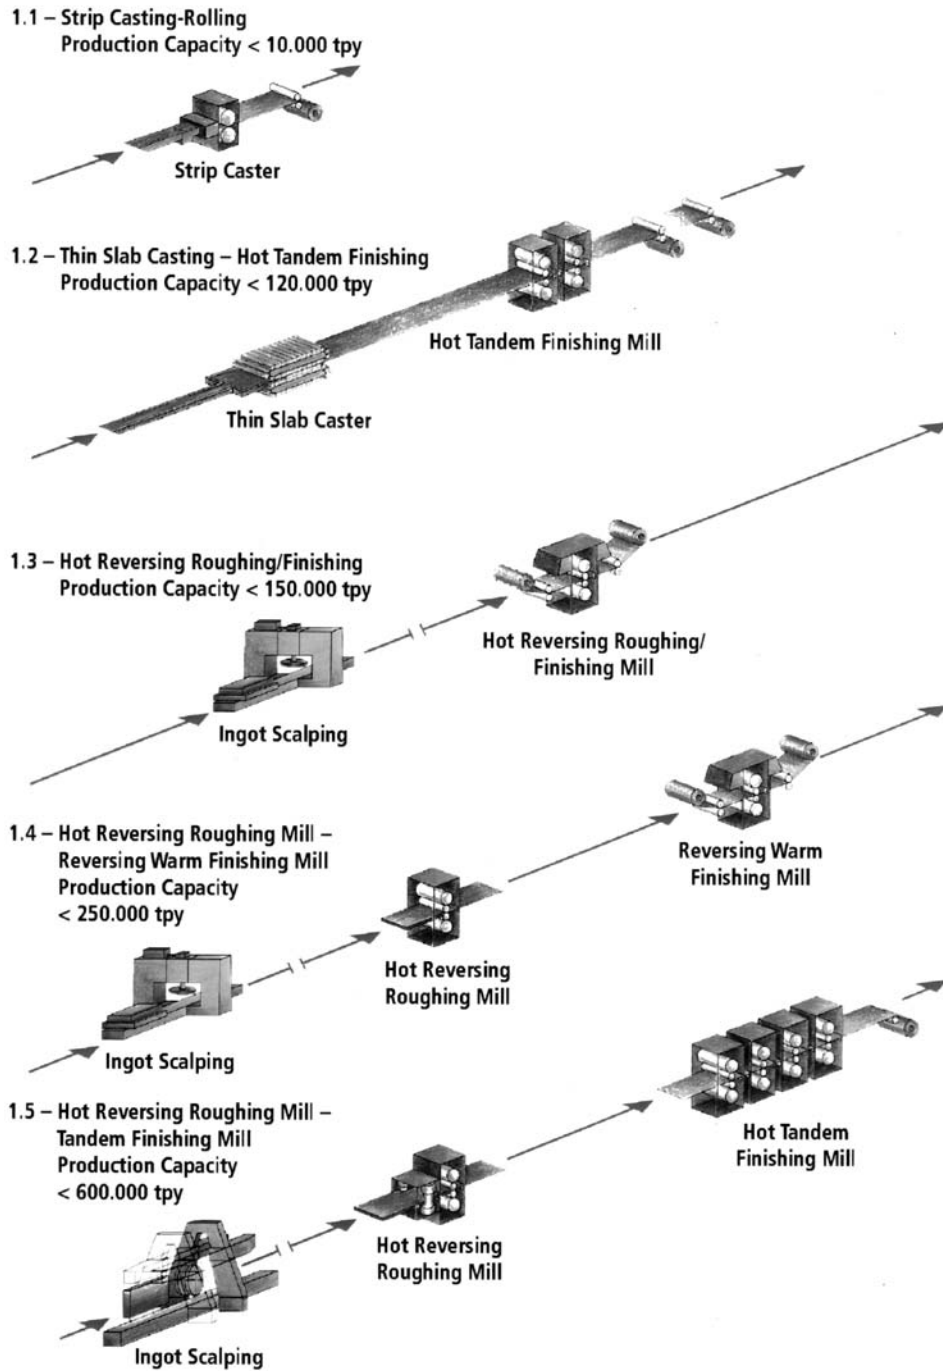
Hot strip casting and rolling mills for aluminum alloys. (From Ref. 5.)
